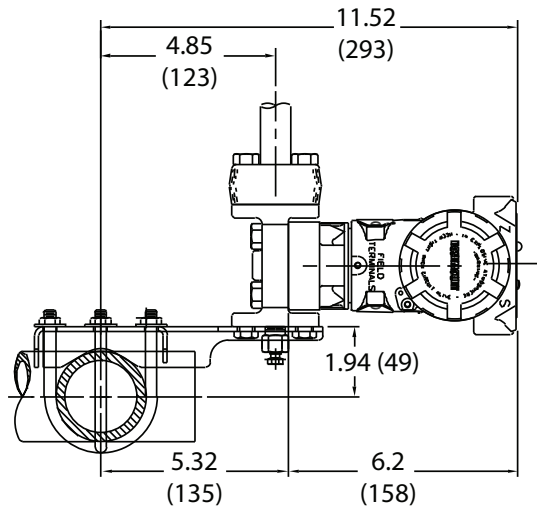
Traditional Flange Mounting Configurations with Optional Brackets for 2-in. Pipe or Panel Mounting
